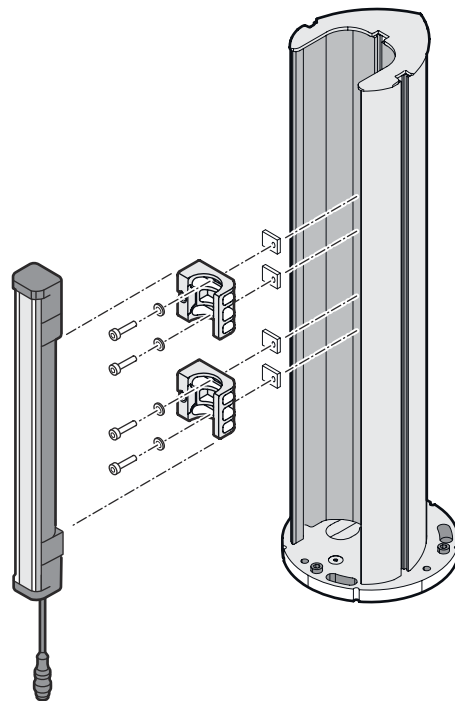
Mounting the FlexFix bracket on a device column (accessory)
